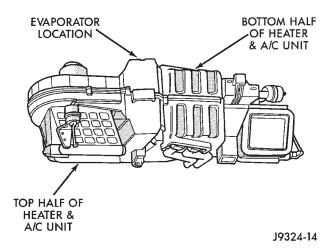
Evaporator Coil Location in Heater-A/C Housing (Upside Down)
